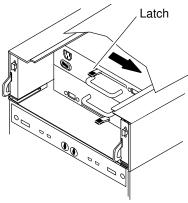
Removing the drive fan pack from the DAS 5300 drawer
